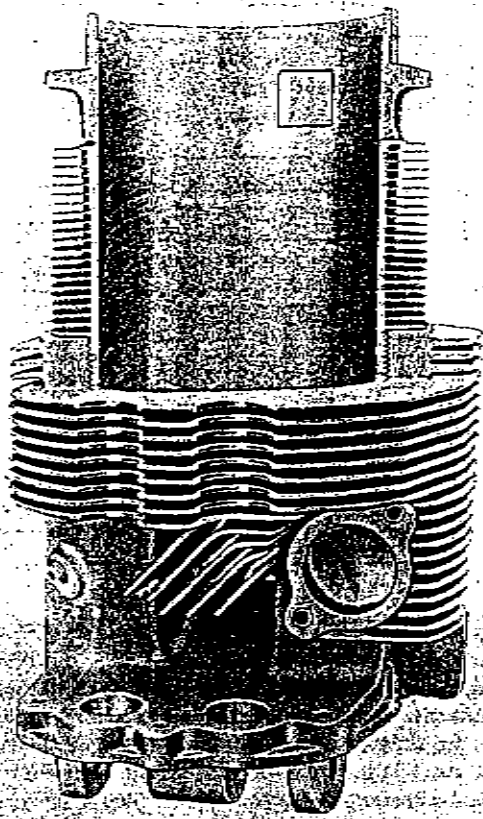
Finish Pattern of Correctly Honed Cylinder Bore
